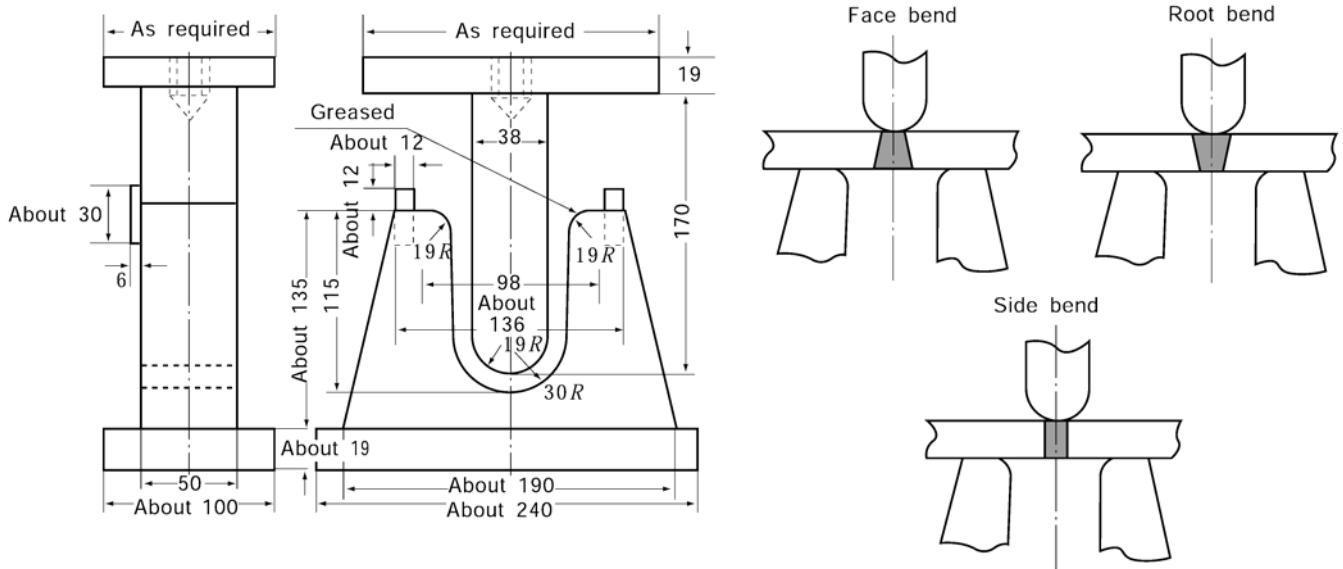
Guided Bend Test Jig (For 9 mm in thick., Unit : mm)
